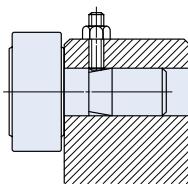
Mounting example of Easy Mounting Type Cam Follower
